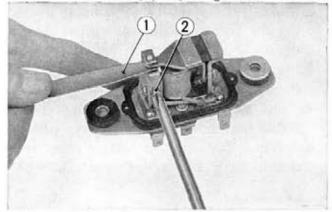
① Thickness gauge ② Point gap lock screw
